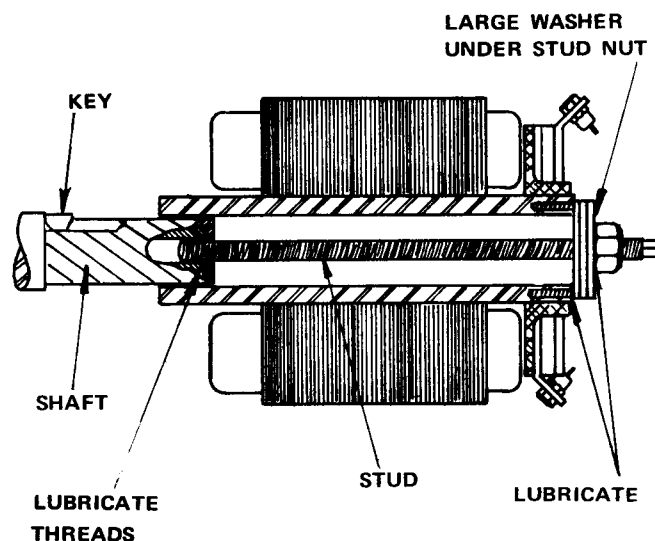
Installing Exciter Armature And Rotating Rectifier Assembly
